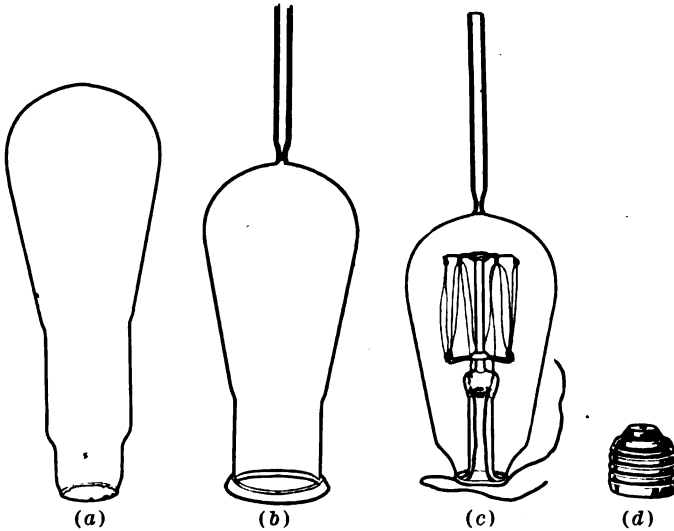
Illustrating the Manufacture of a Mazda Lamp. (a) Mold-blown bulb. (b) Tubulated bulb. (c) Completed mount sealed in bulb. (d) Edison shell brass screw base.
